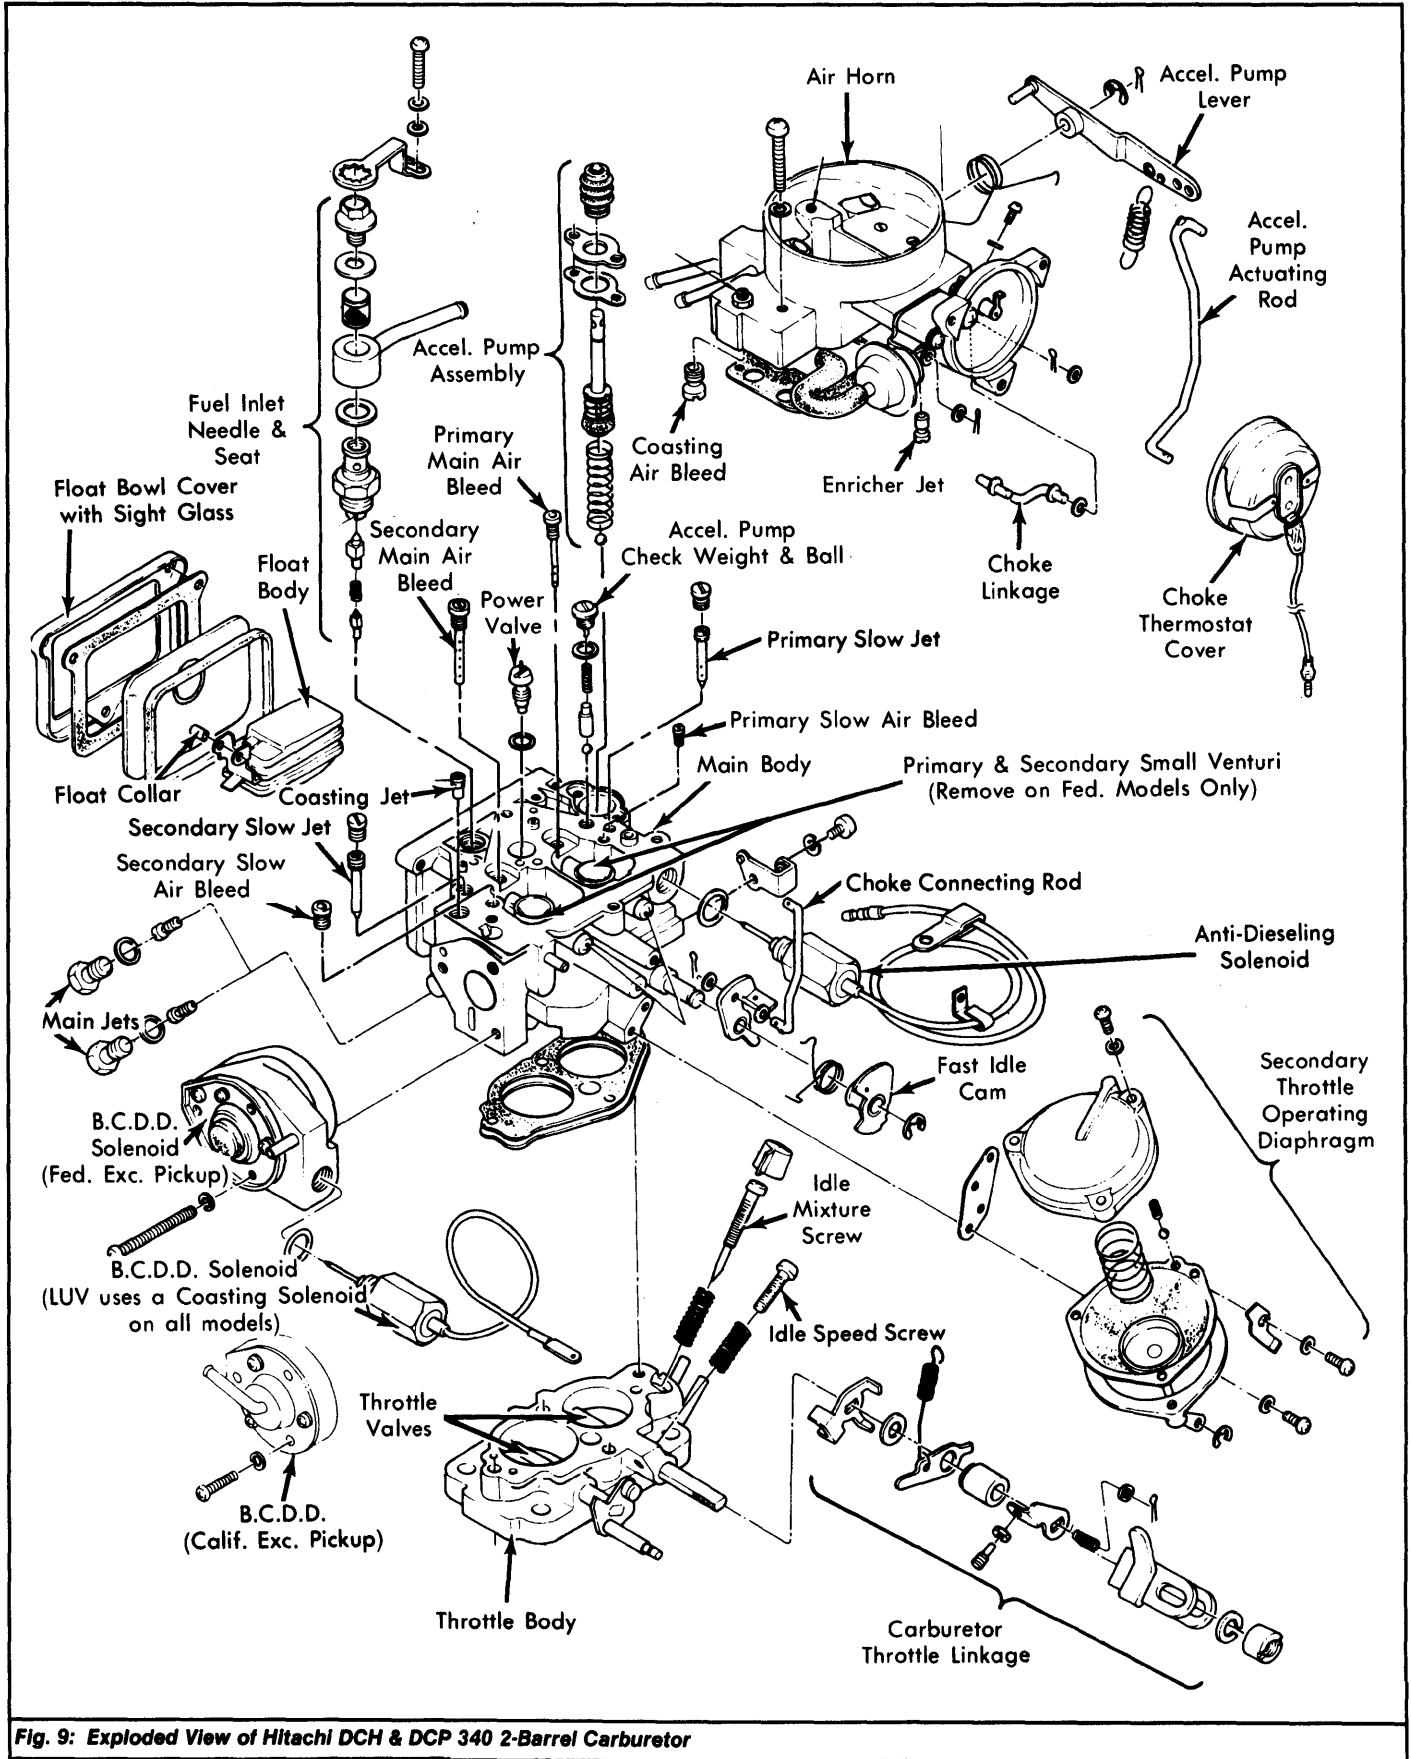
Exploded View of Hitachi DCH & DCP 340 2-Barrel Carburetor
